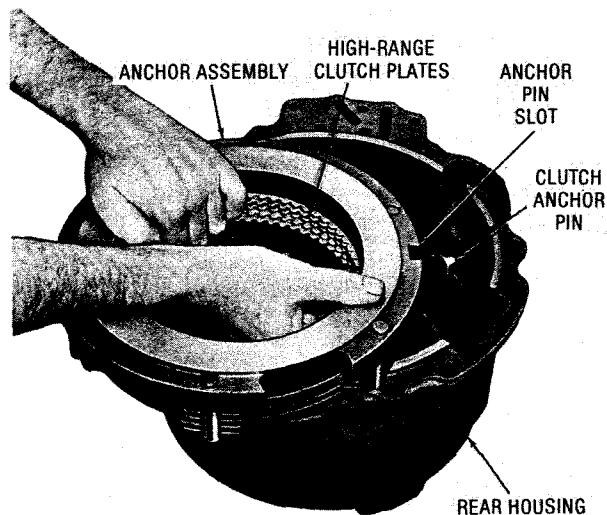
Installing high-range clutch anchor and plates (TRT-1)
